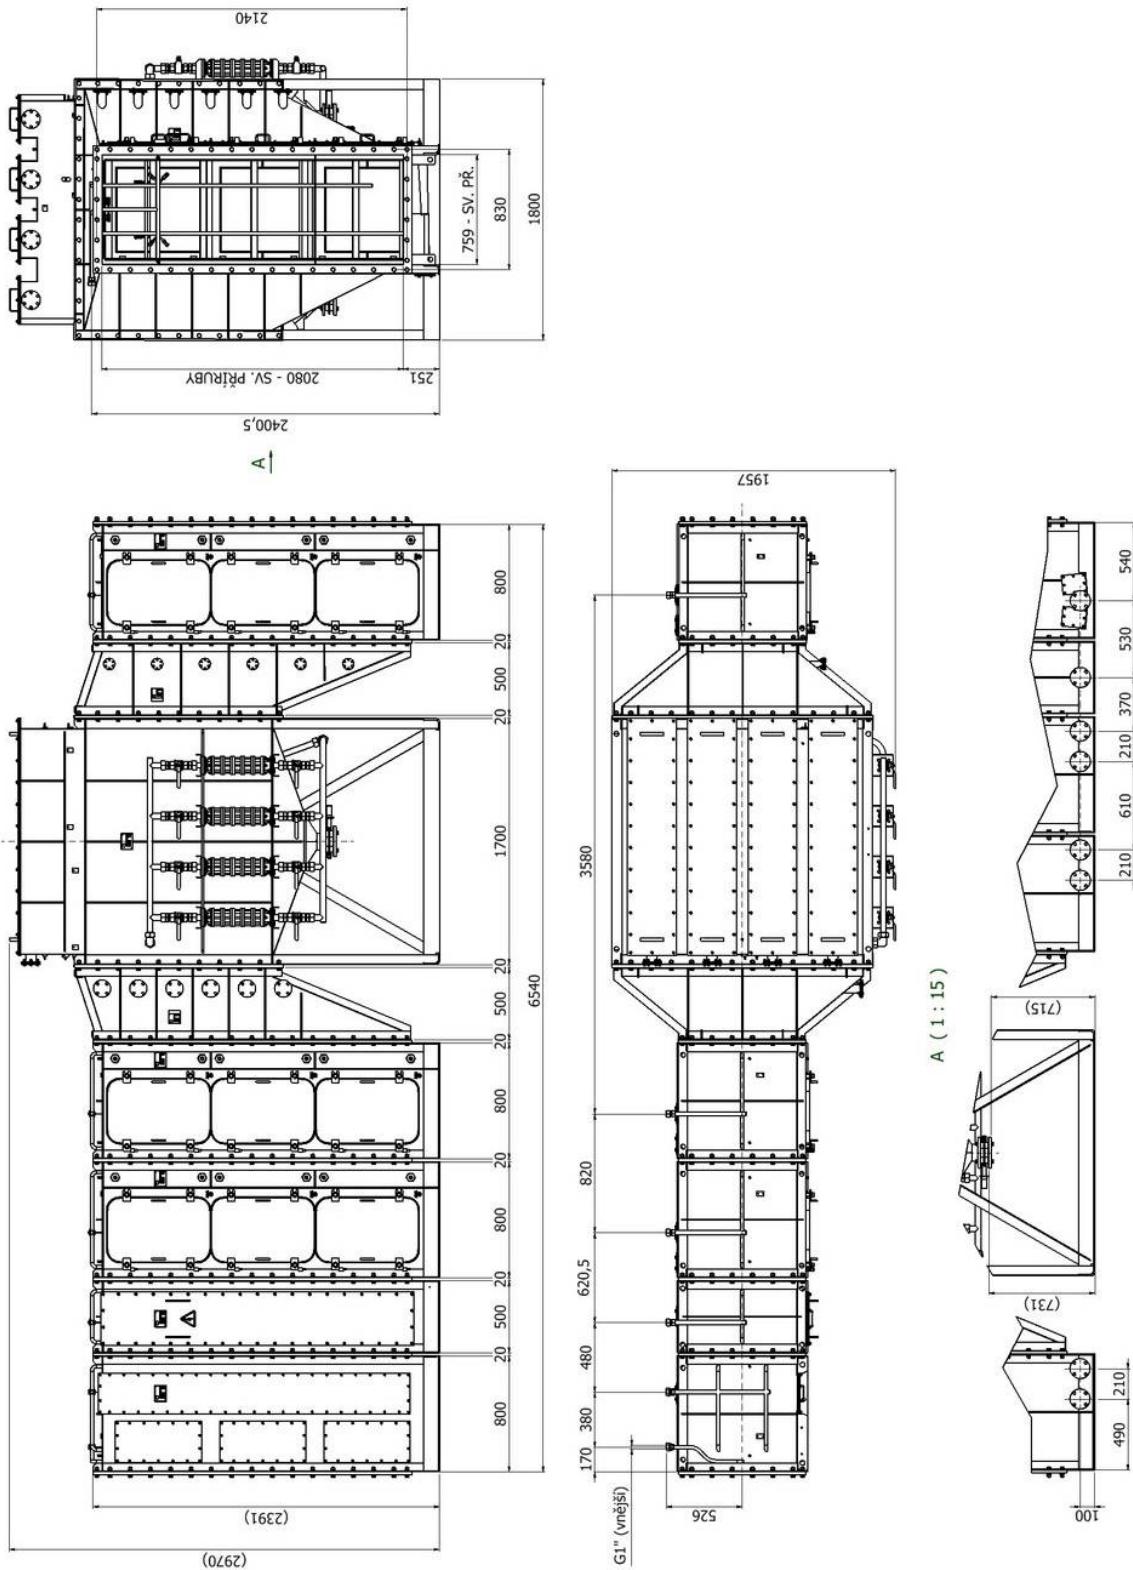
Main dimensions of the filter unit 12, solid right-hand model
